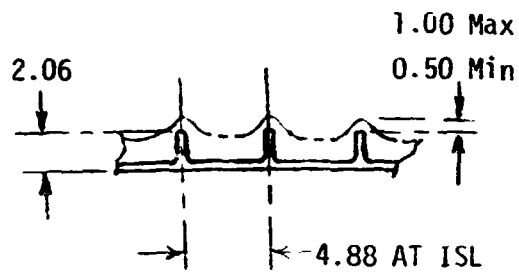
Thrust Panel and Skin Stringer Panel Located on Intertank
